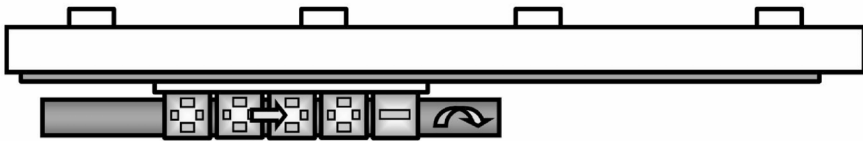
Testing principle of a testing portal with 5 probe holders and helical testing traces
